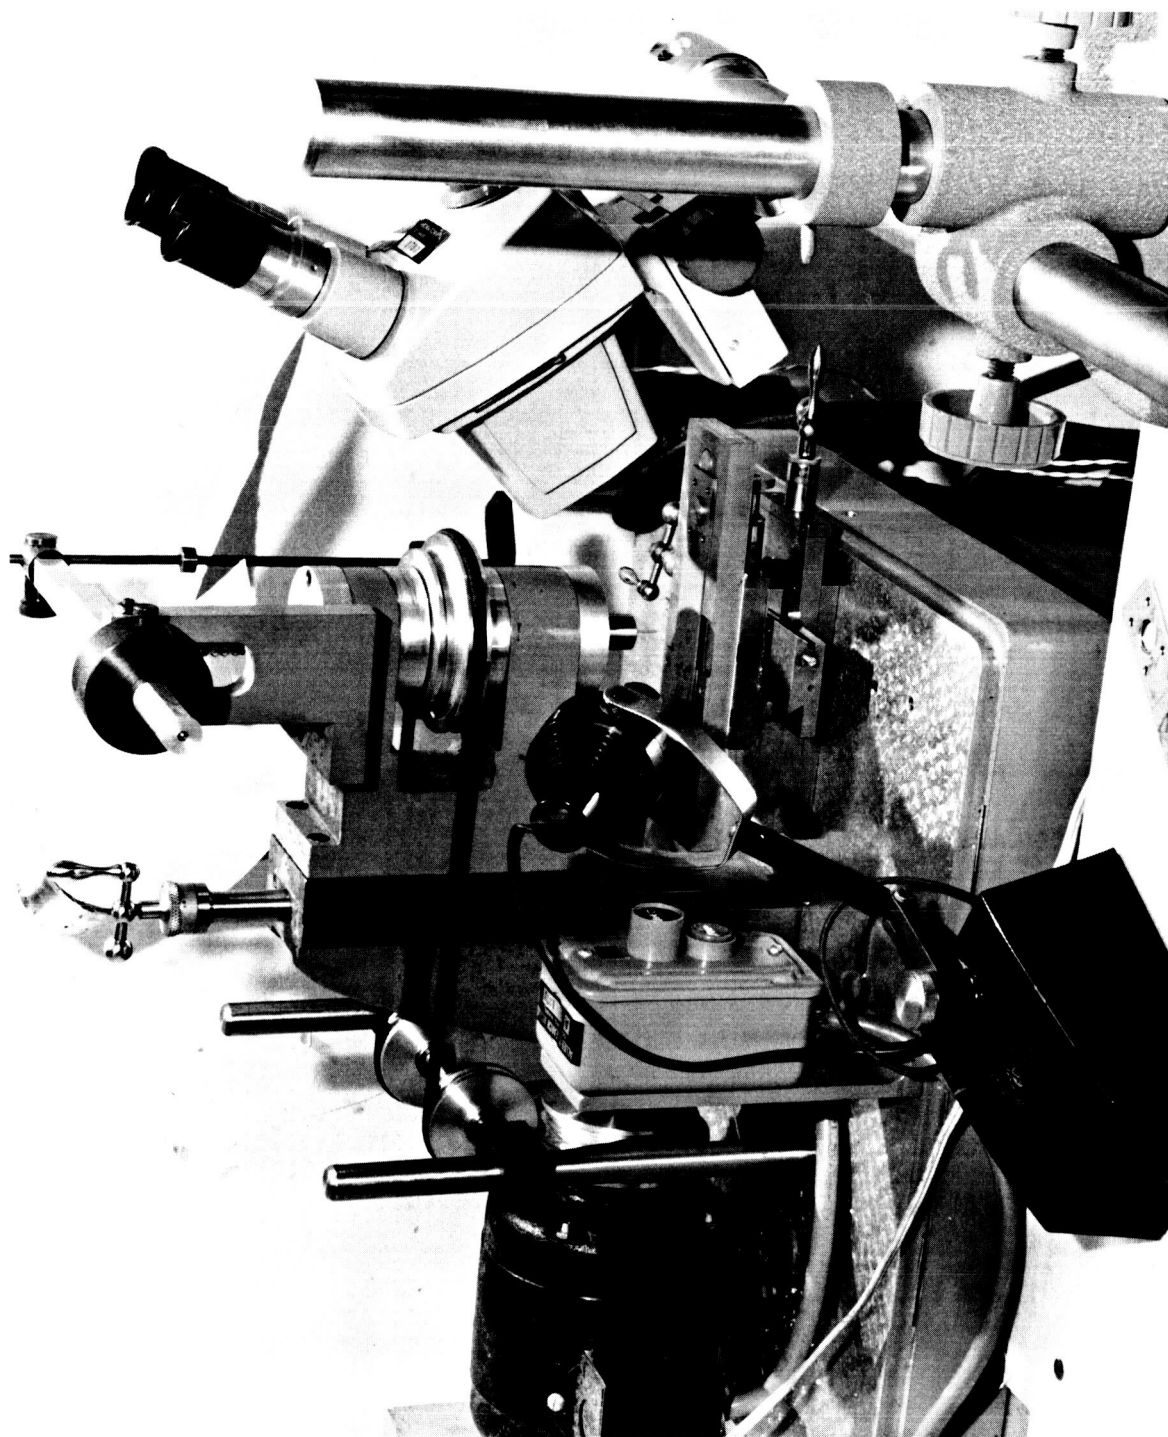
Micro-Drill Press and Microscope Arrangement for Drilling Notch-End Holes in Specimens.
